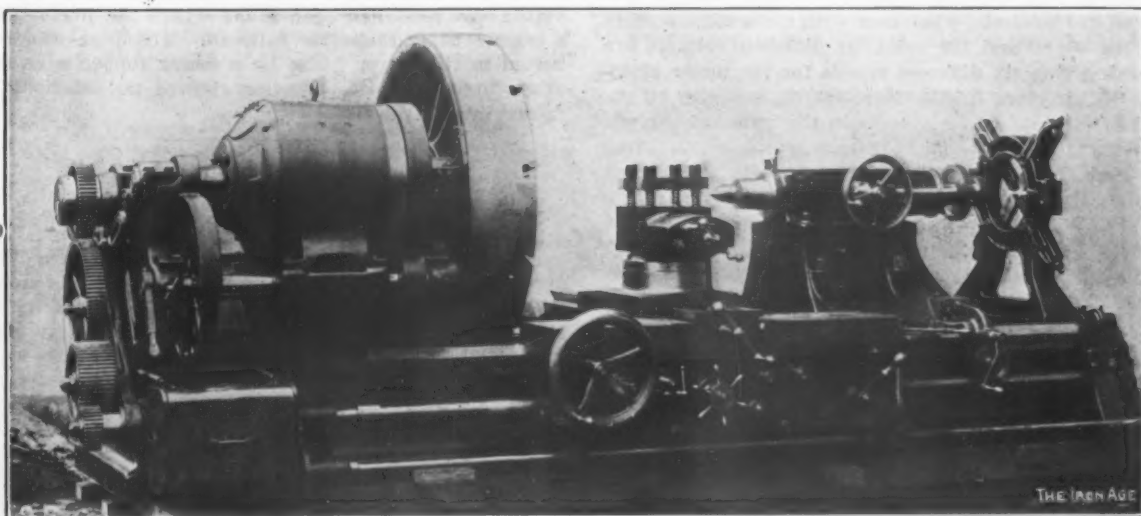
A 52-Inch Motor Driven Engine Lathe Built by the American Tool Works Company, Cincinnati, Ohio.
